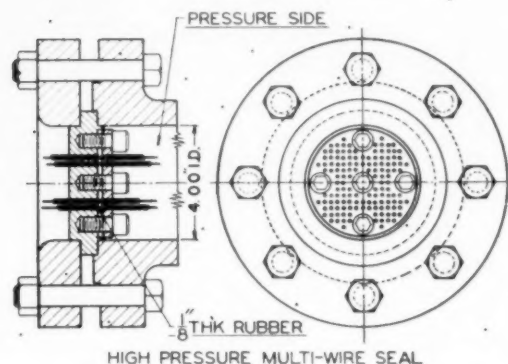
HIGH-PRESSURE MULTI-WIRE SEAL
